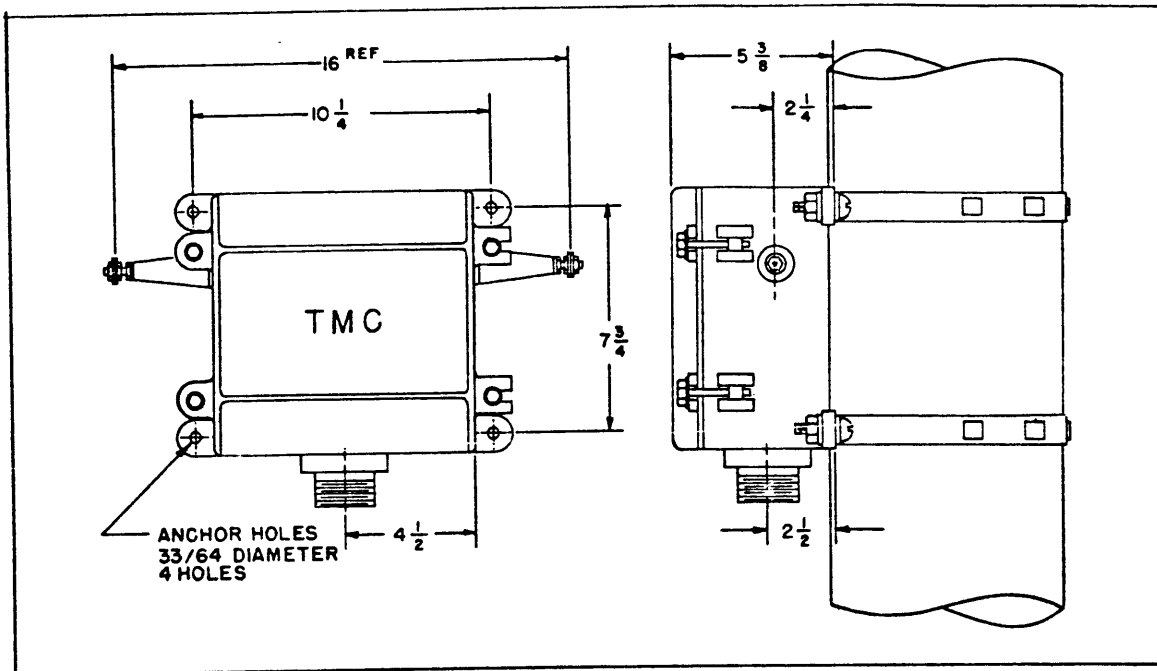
Outline and Mounting Dimensions, Model TRC-500
